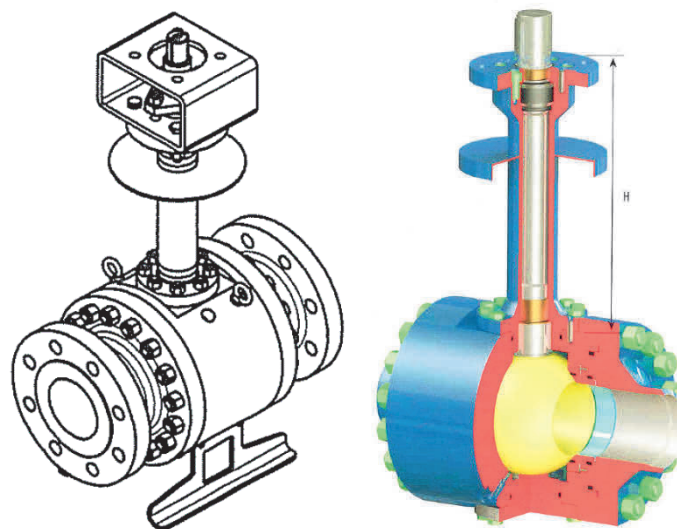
3D View of the K92 type ball valve assembly for cryogenic use
